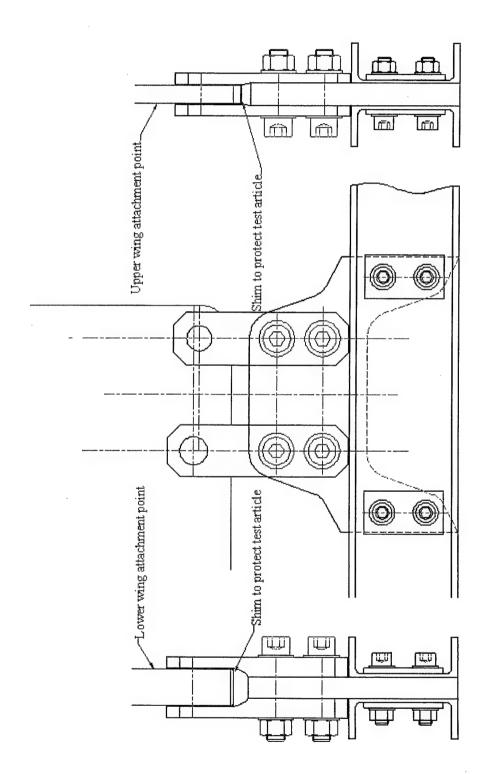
F/A-18 Detailed Design of Beam to Wing Lugs Joint
